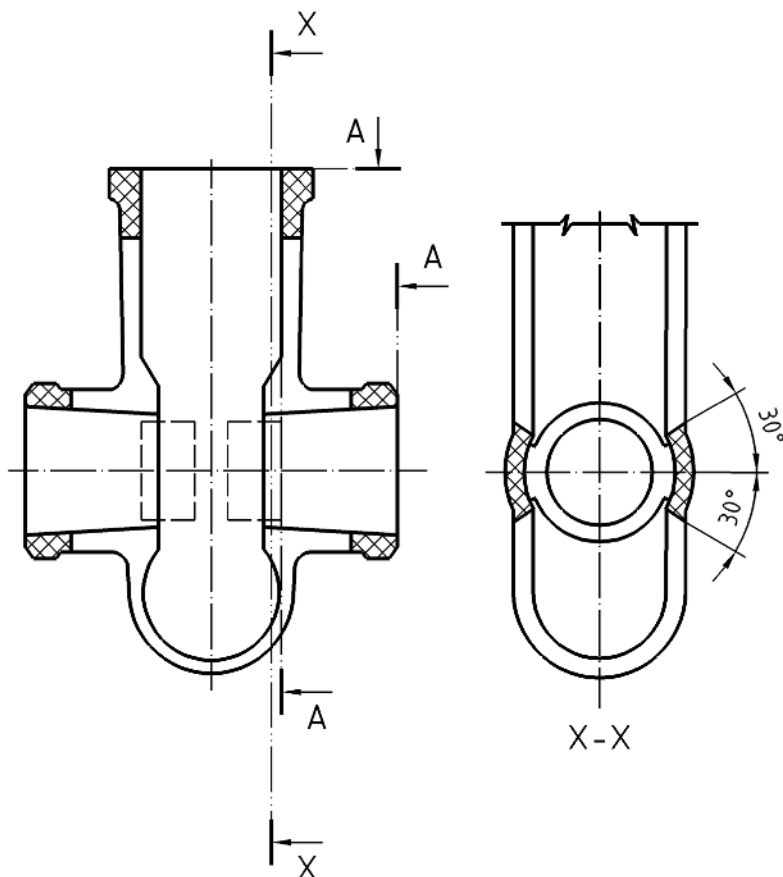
Typical casting section showing required radiographic examination of conduit gate valve body (pressure seal bonnet)
